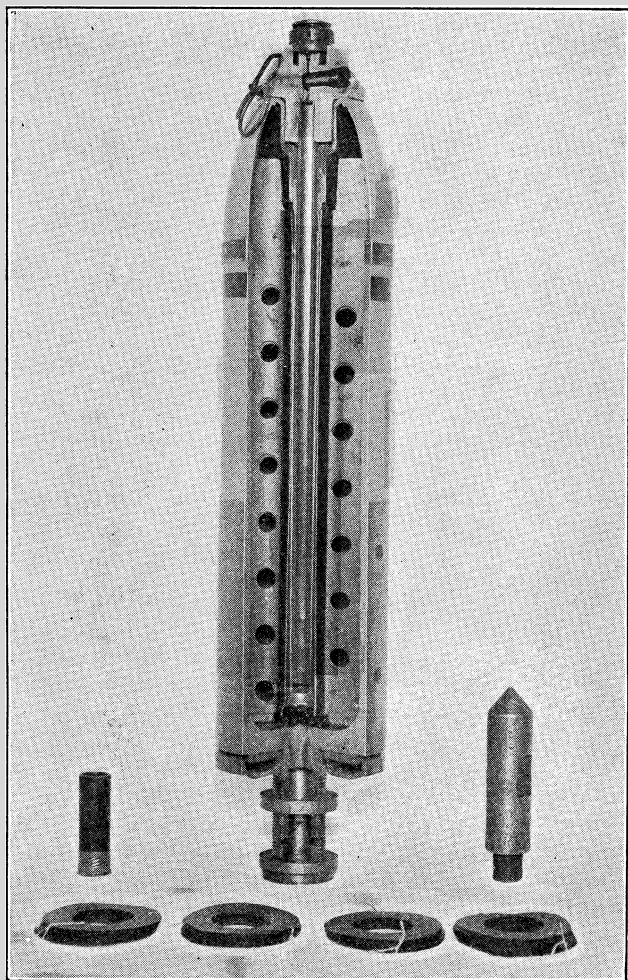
When using the outer nut instead of the striker nut, the pointed 4.75' striker pin must be used
